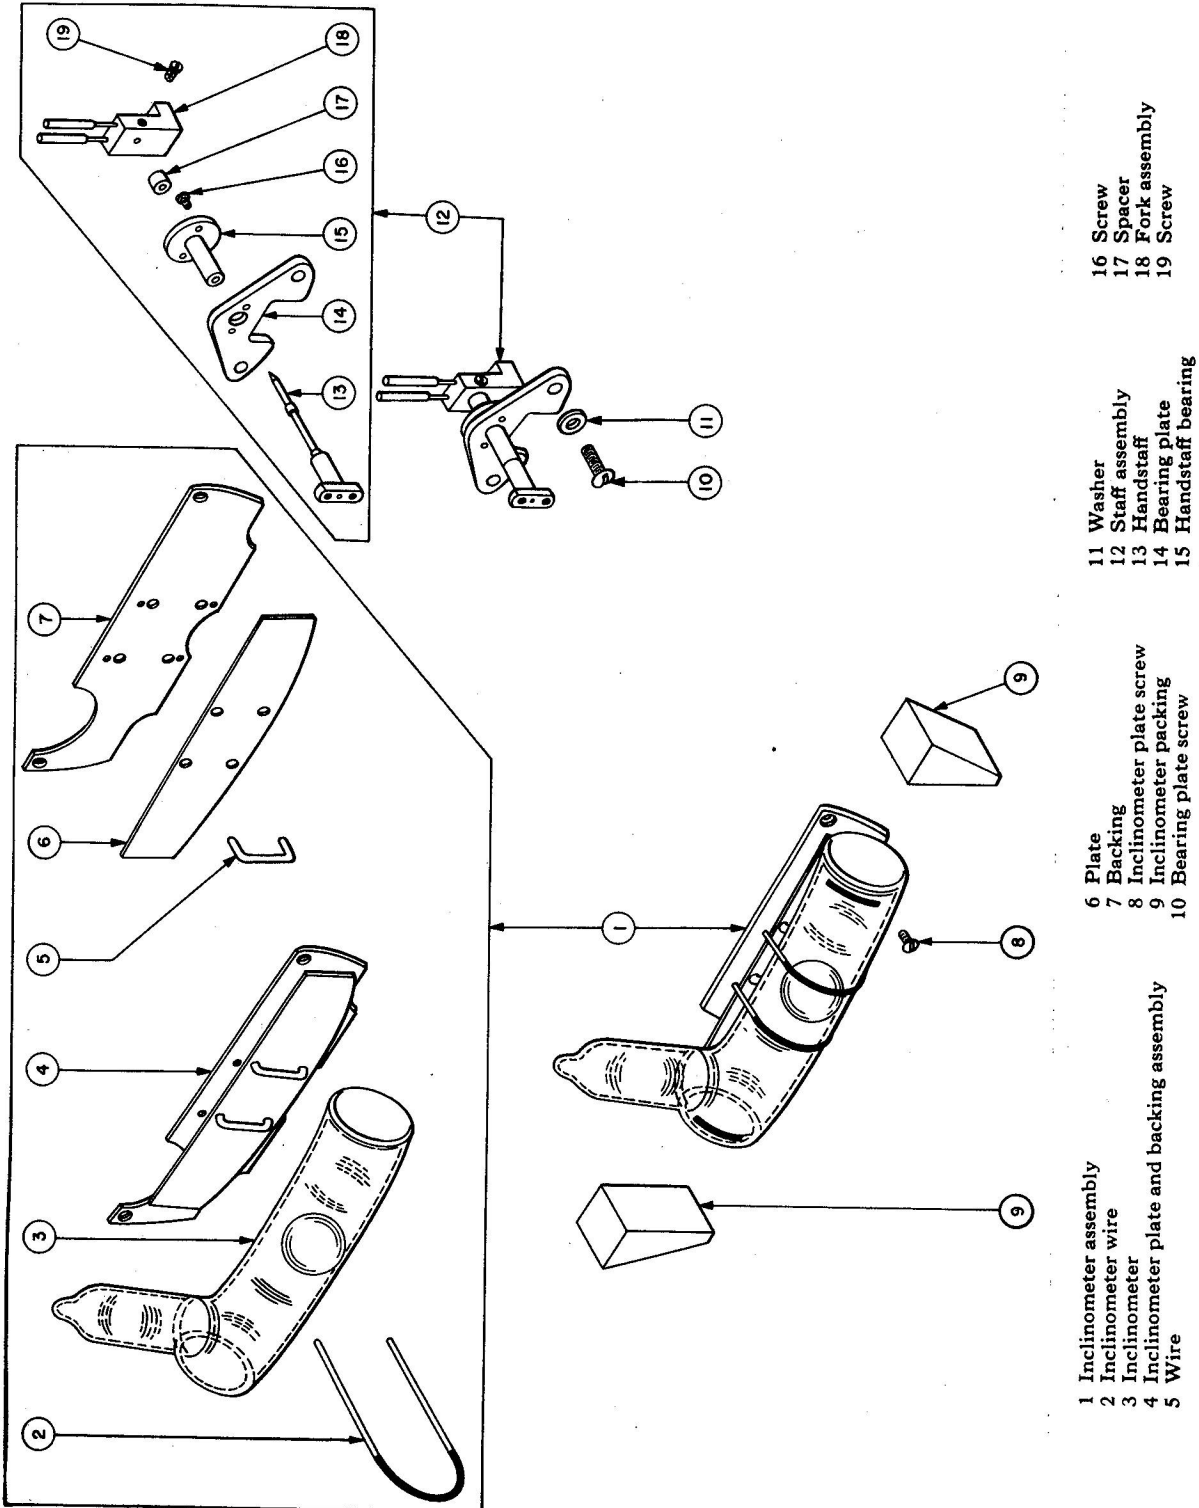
Exploded View Drawing—Inclinometer and Handstaff Assembly—Navy Types FSSC 18-I-462 (Pioneer Type 1713-1Y-A1), FSSC 88-I-3280 (Pioneer Type 1719-1AF-A1), and FSSC 88-I-3281 (Pioneer Types 1719-1AN-A1 and 1719-1AQ-AS).
